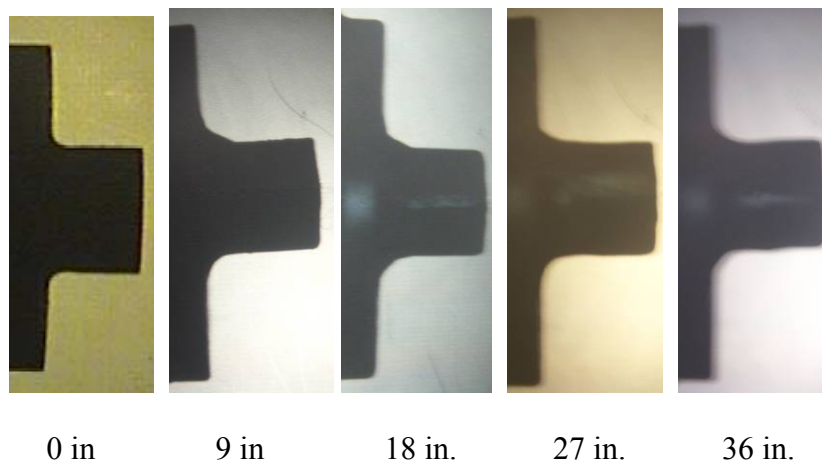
Wear of Trivex tool for butt welding of Al 6061/SiC/17.5p at 1000 rpm and 10 ipm.
